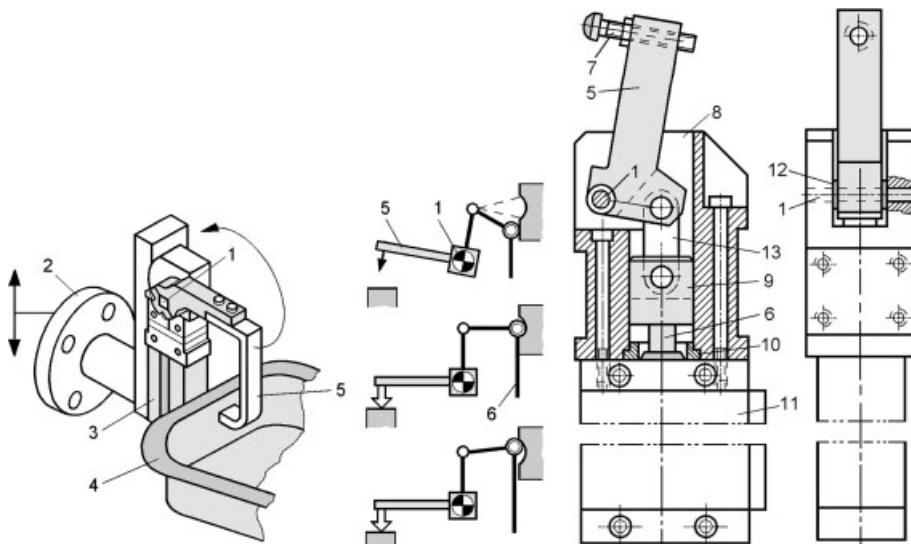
Gripping of large sheet steel parts with a toggle lever clamp
